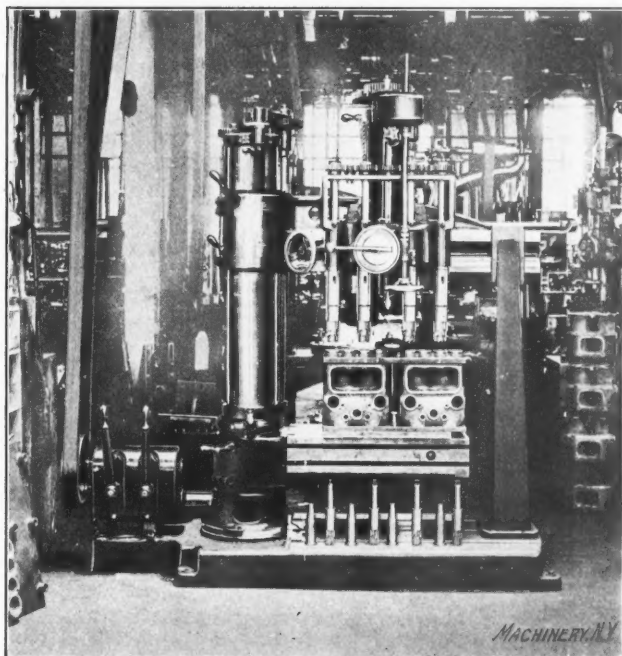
"American" Radial Drill in Winton Factory, with Four-spindle Attachment for Reaming Automobile Cylinders
